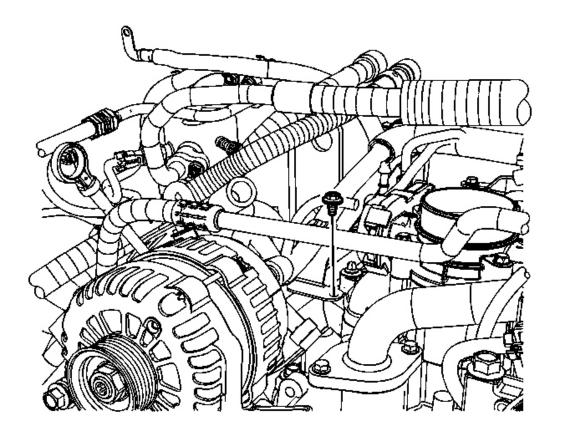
Engine Wiring Harness Bracket Bolt Courtesy of GENERAL MOTORS CORP.
